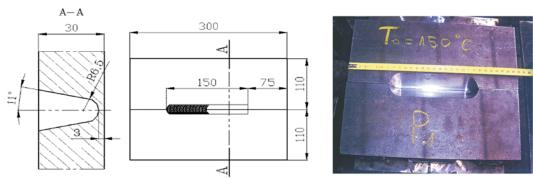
Plate dimensions for RD test and prepared groove for welding Slika 4. Dimenzije ploča za RD test i pripremljeni žlijeb za zavarivanje
